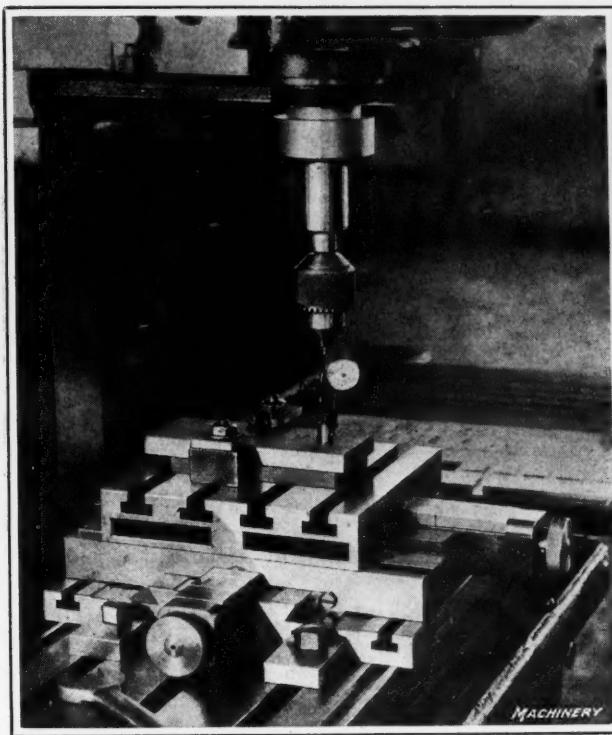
Using Indicator for truing up a Button before boring the First Hole
